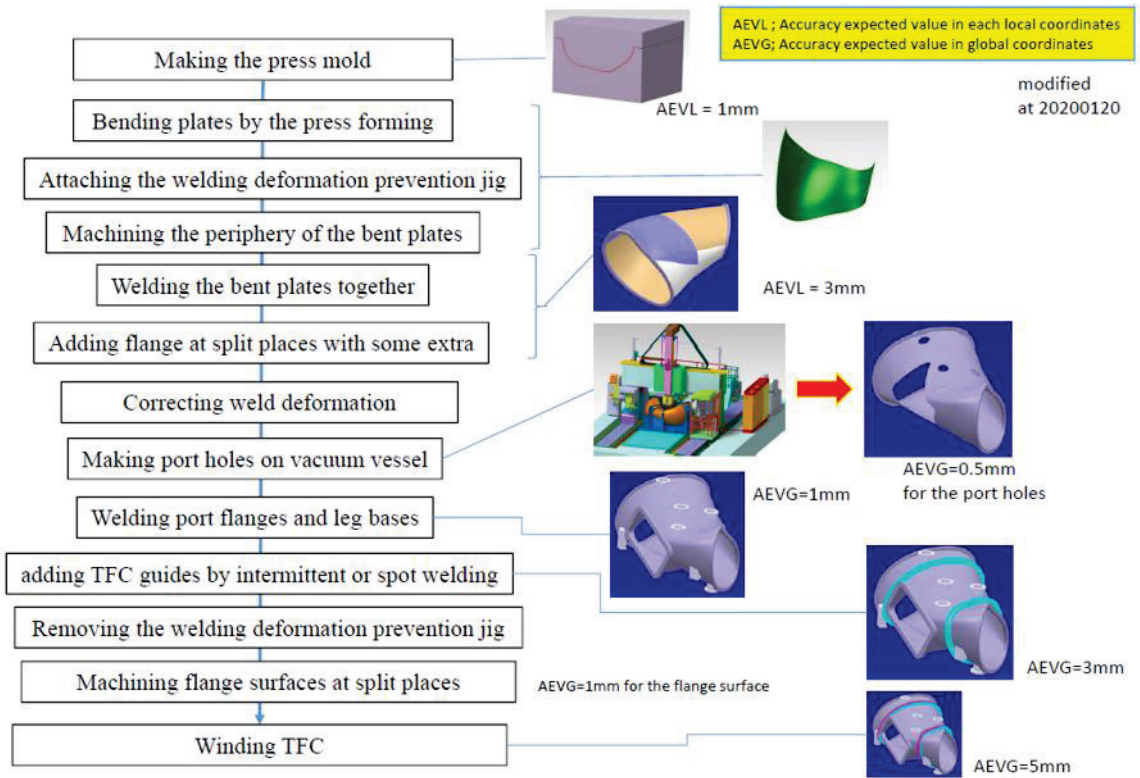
Procedure to product one section of vacuum vessel.
